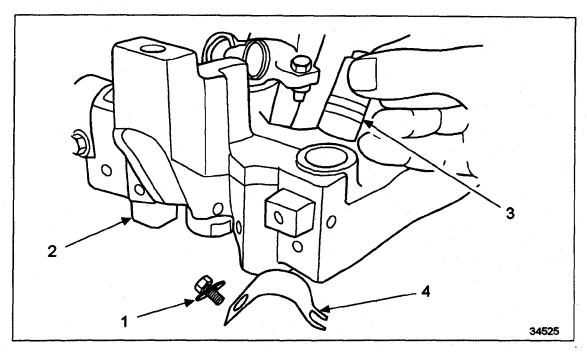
Removing Piston from Accumulator Bore with Magnet
